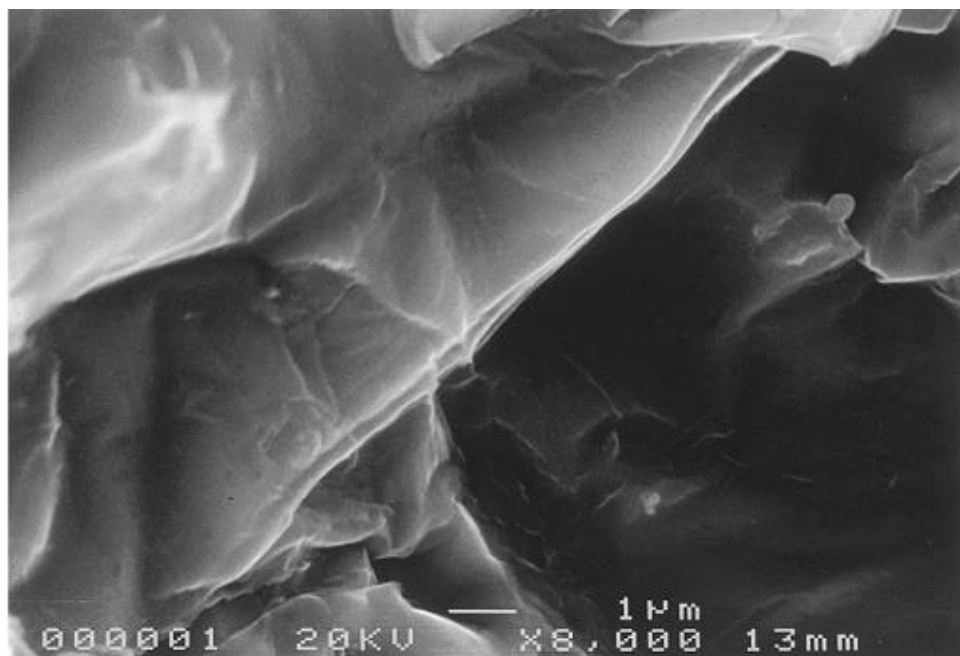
A bifilm on the fracture surface of an Al-7Si-0.4Mg alloy casting [5].
